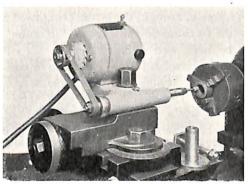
"Dumore" electrically driven tool post grinder, performing internal grinding operation in lathe
